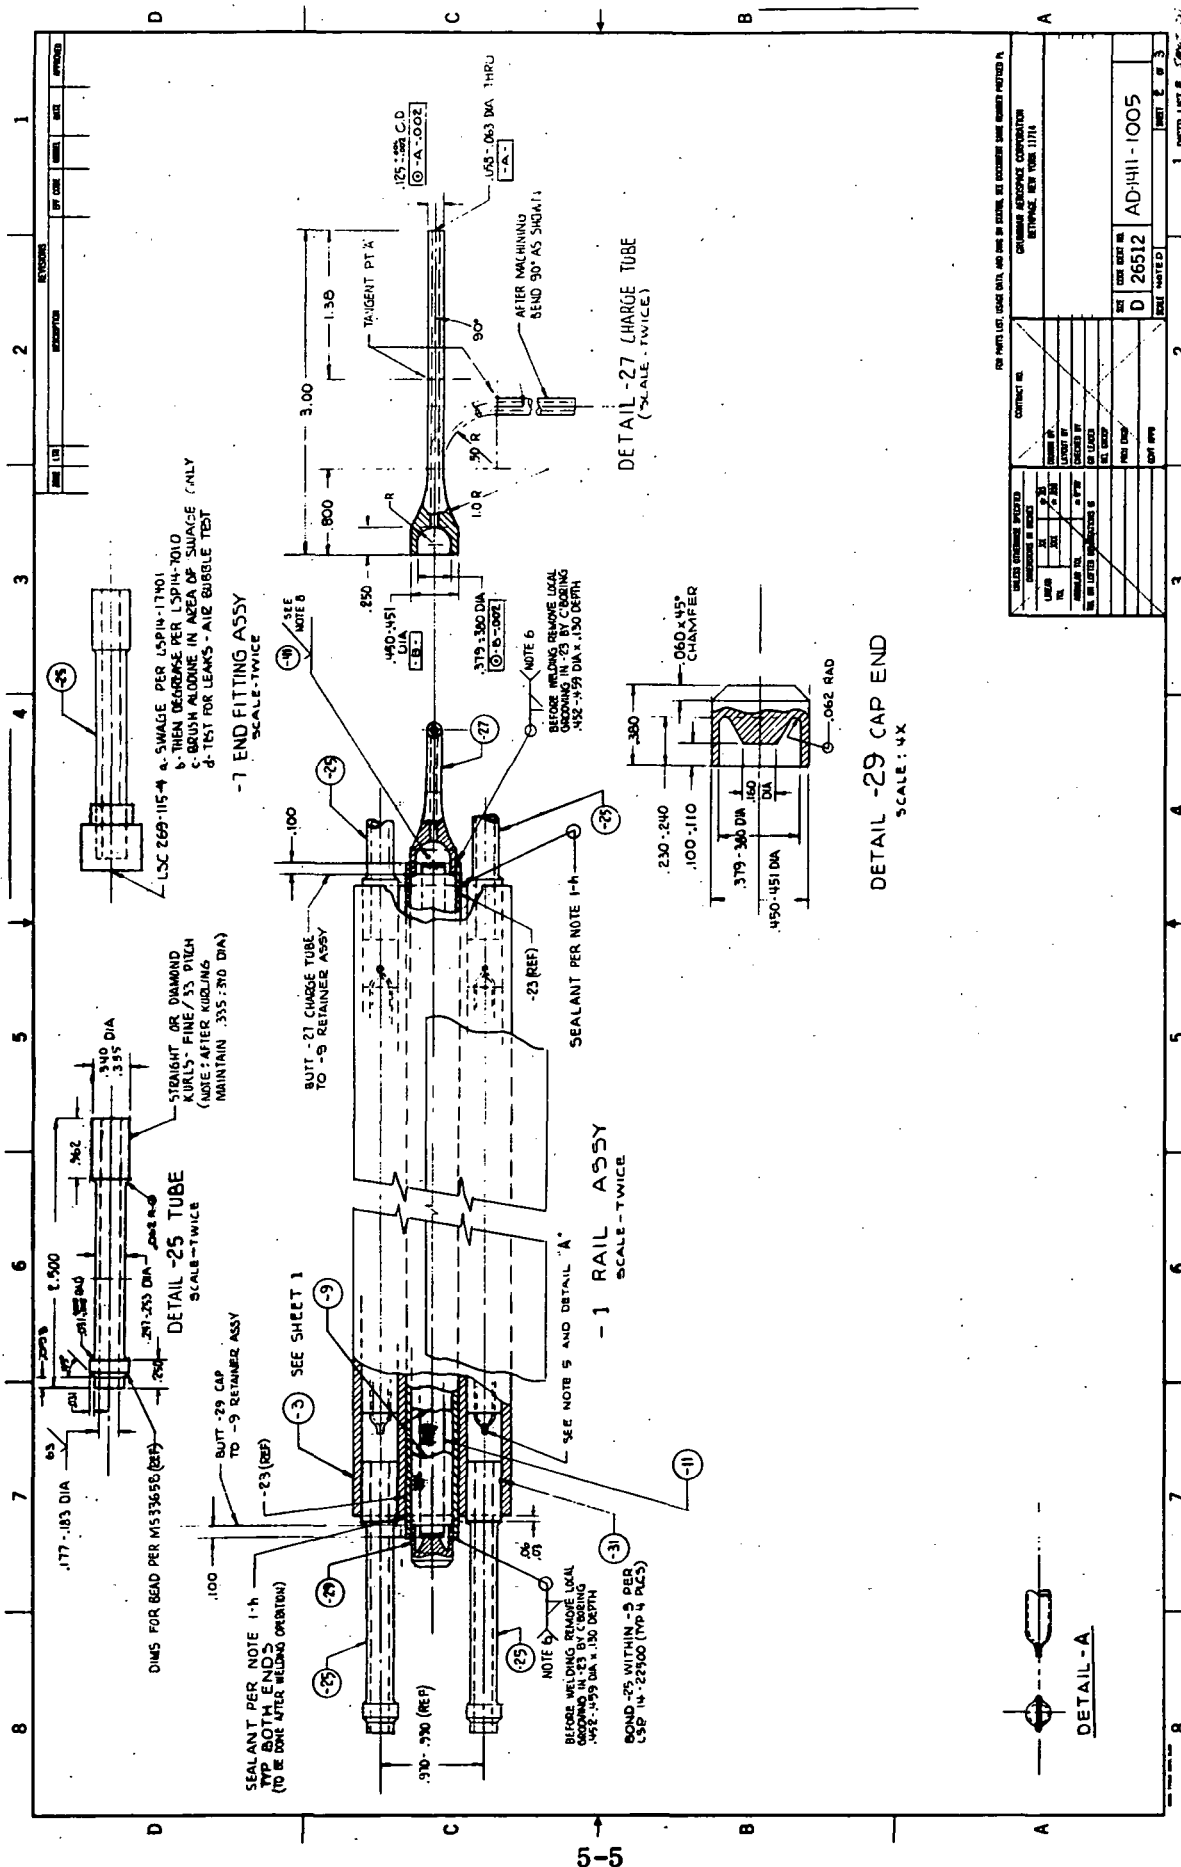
HP Augmented Cold Rail Assembly (Sheet 2 of 3)
